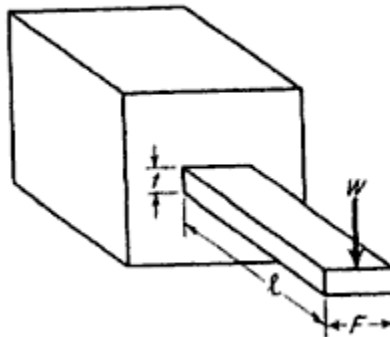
A loaded cantilever beam (Dudley, 1984)
